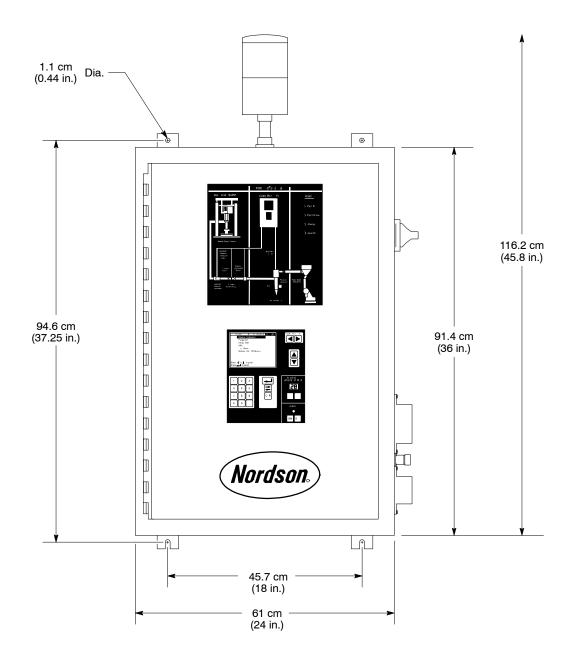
Mounting Dimensions and Clearance Requirements (Front View)
